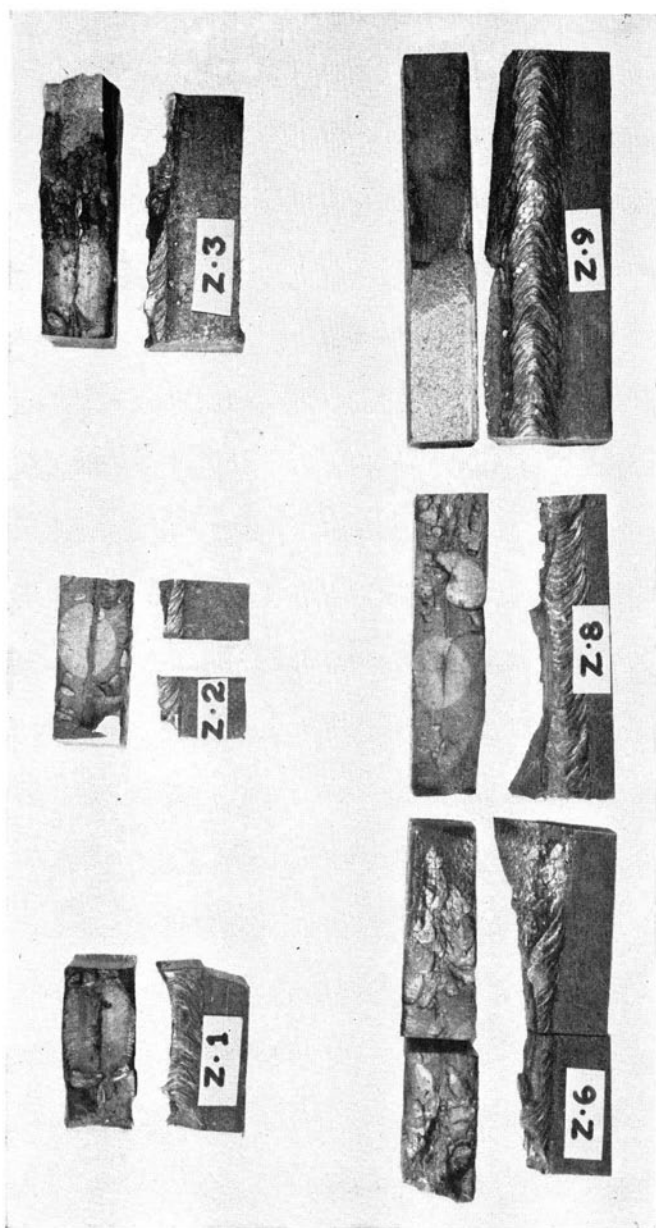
(a). FRACTURES OF THE Z SPECIMENS
